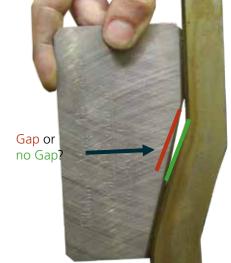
Forum B + V Oil Tools 18° and 15° Gauge (P/N 600018)
